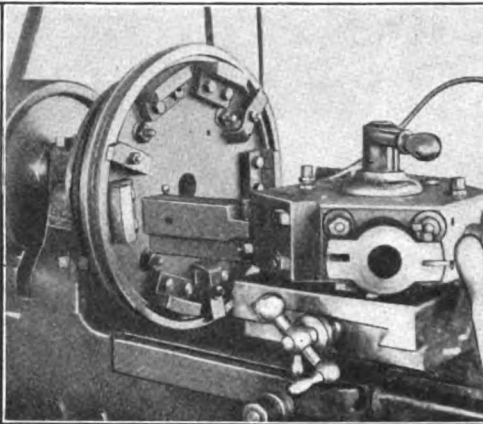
TRUING THE CHANNEL EDGES IN A LATHE
